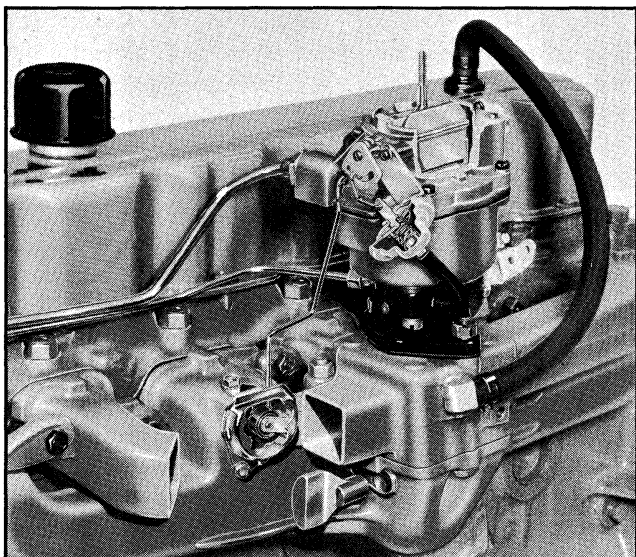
B-8 Thermostatic Coil and Connecting Rod
